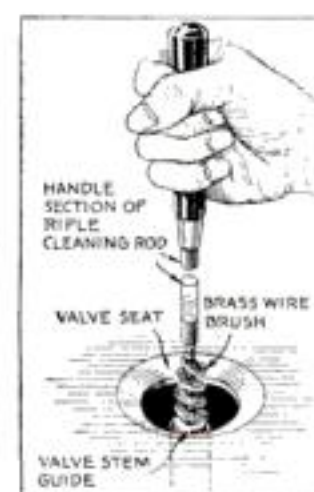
With the use of this wire brush carbon is cleaned from the valve guide.
